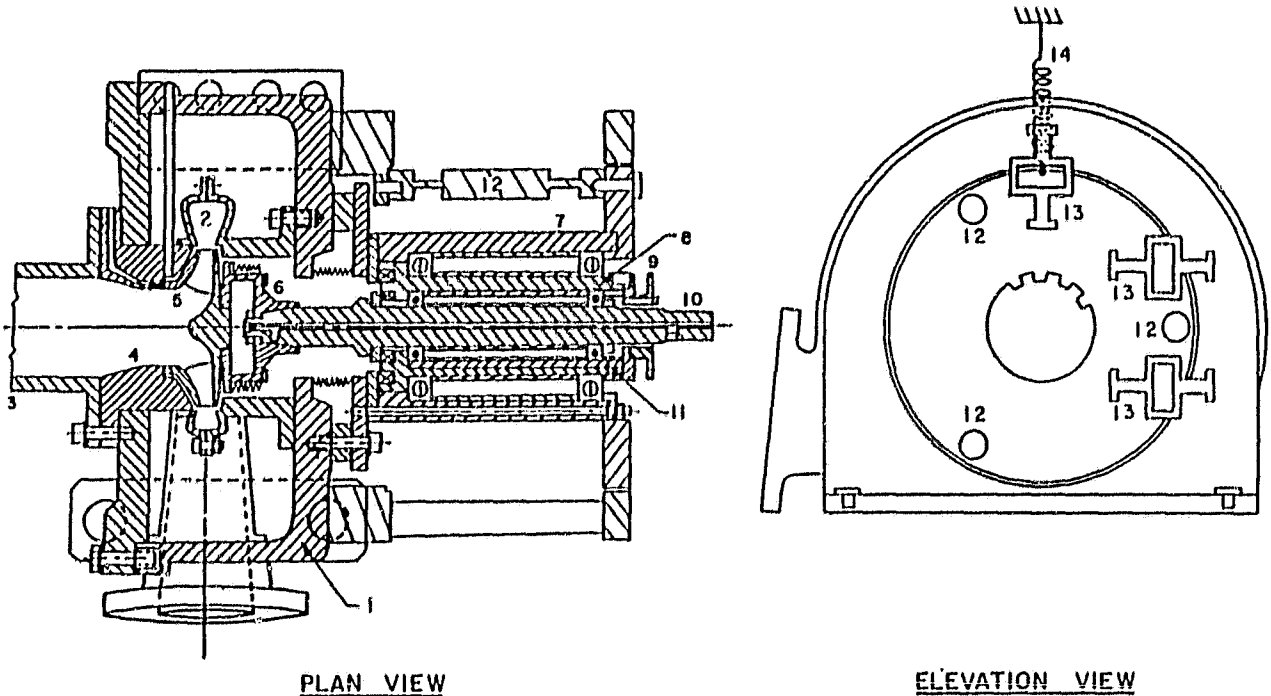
Schematic of Pump Housing and Force Balance Assembly of Rotor Force Test Facility. Pump Housing (1), Volute(2), Inlet Connection (3), Inlet Bell (4), Impeller (5), Internal Balance (6), Double Bearing Shaft (7), 8, 11), Orbiting Motion Sprocket (9), Main Shaft (10), Axial Retaining Flexure (12), External Balance Flexure Elements (13), and Retaining Spring (14).
